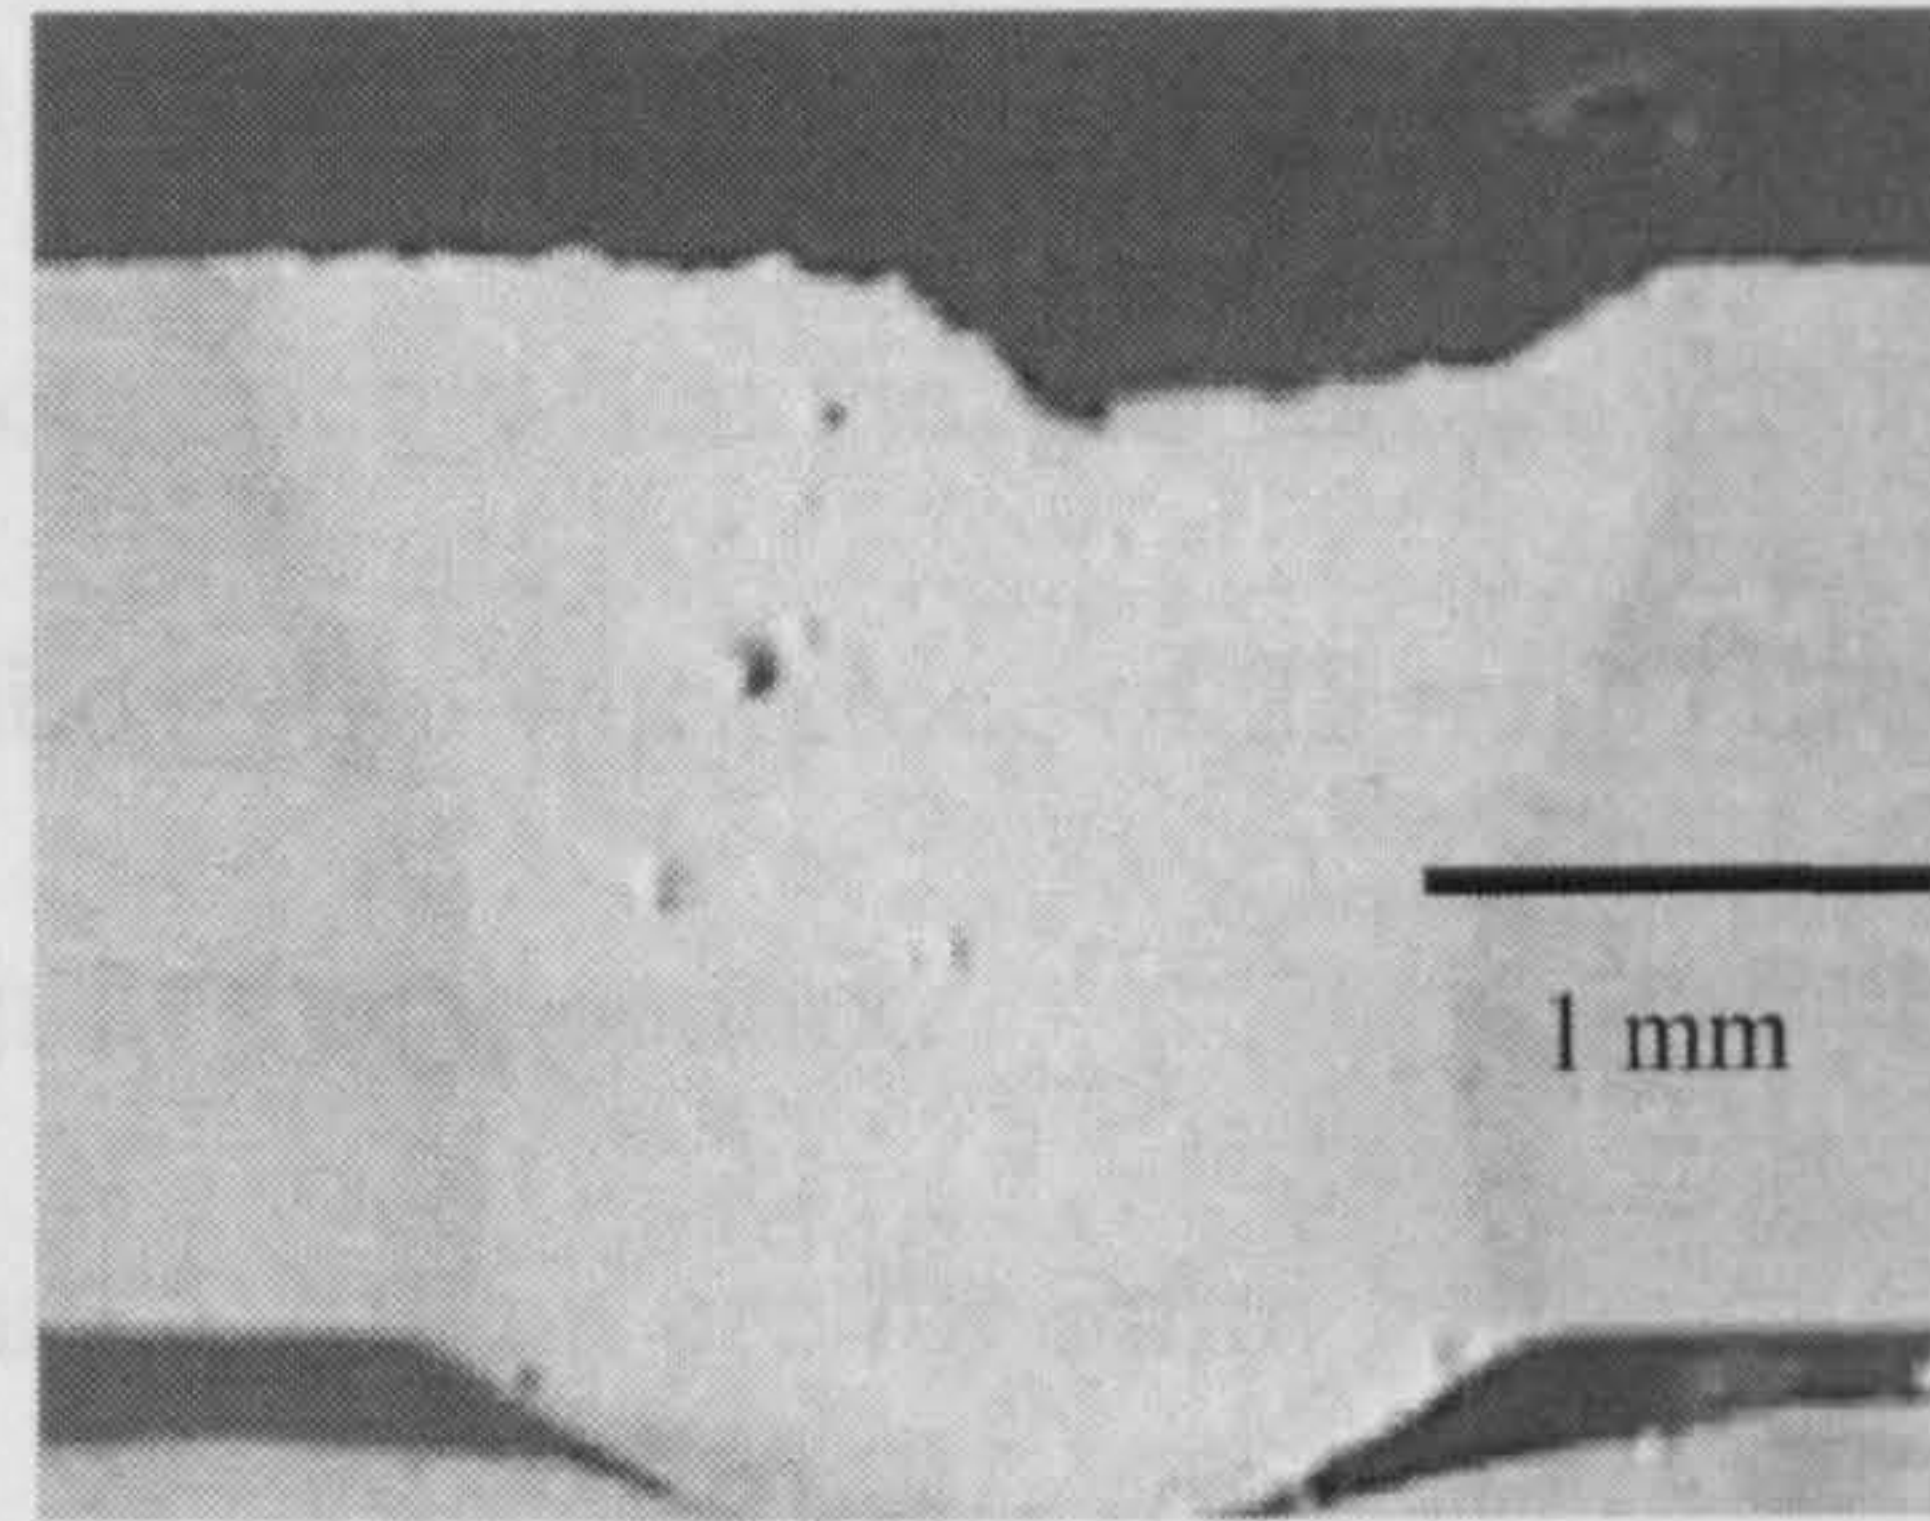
Micrograph of 2mm AA5083 keyhole weld showing pores that have formed inside; weld speed = 1100mm/min
